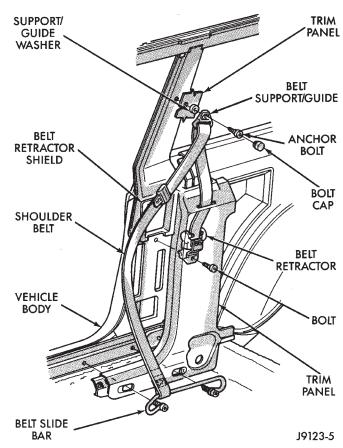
Front Shoulder Belt—2-Door Vehicles
